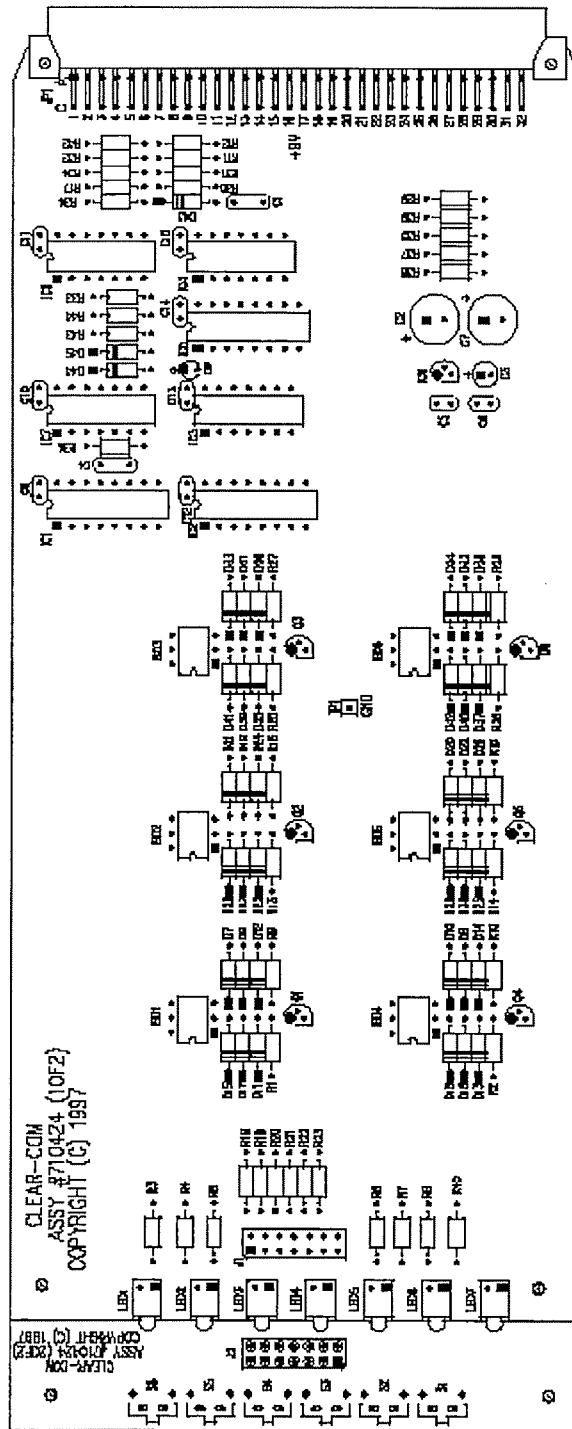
Assembly Drawing - GPI-6 PCB, Rev. B
